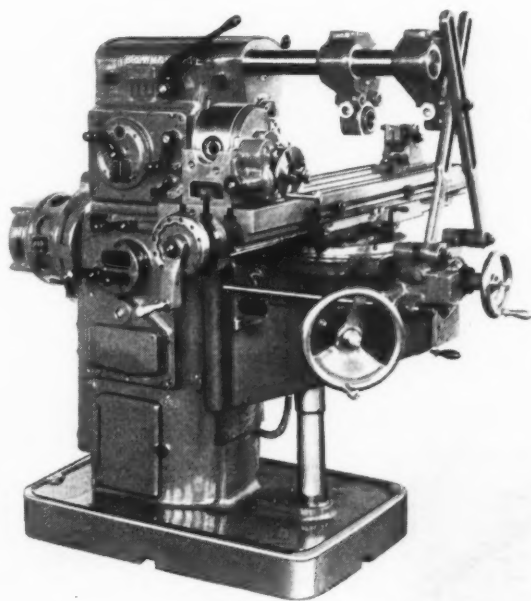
Brown & Sharpe Light Type Universal Milling Machine with Power Fast Travel
